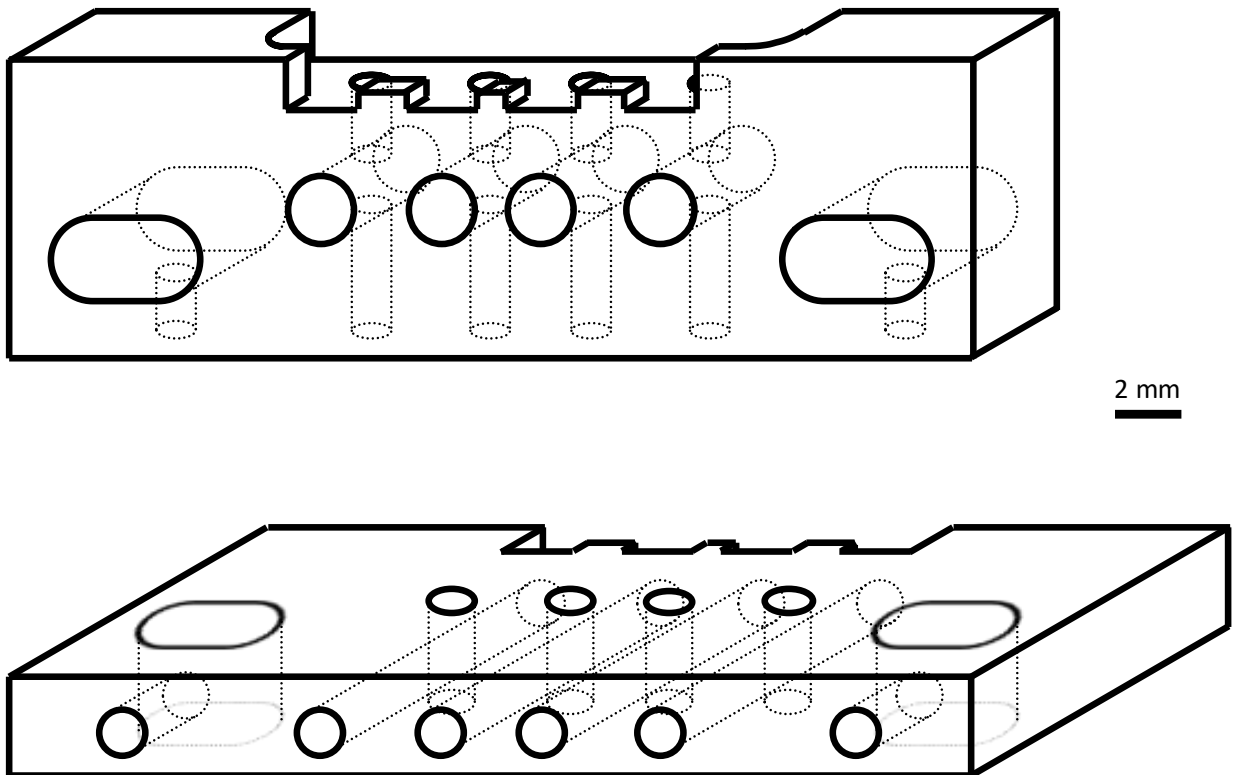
Technical drawings for the thermocontact holder at the manipulator.
